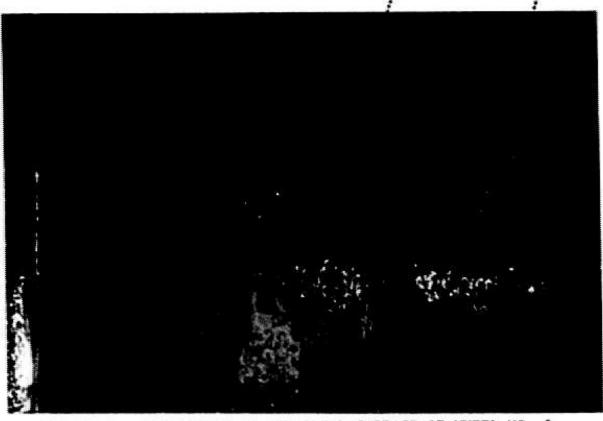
APPEARANCE OF THE TREAD SURFACE OF WHEFL NO. 5, SHOWING A THERMAL CRACK AS REVEALED BY FLUORESCENT MAGNETIC-PARTICLE INSPECTION. SCRIBNER MARKS ON CORNER OF TREAD WERE USED FOR REFERENCE FOR NONDESTRUCTIVE TESTS CONDUCTED BY OTHER CONTRACTORS (ABOUT 2X)
